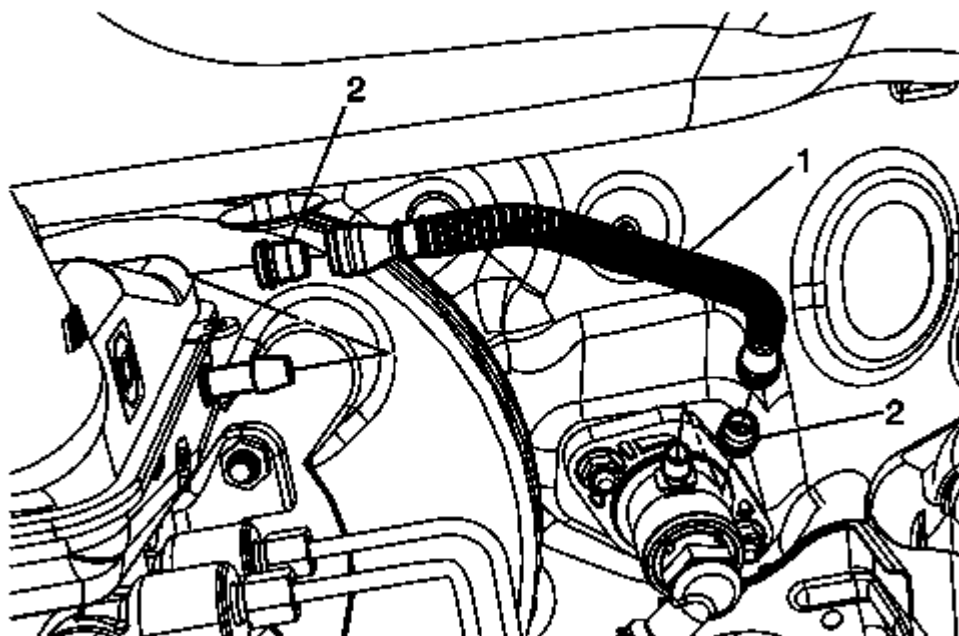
Clutch Master Cylinder Reservoir Hose And Hose Seal
